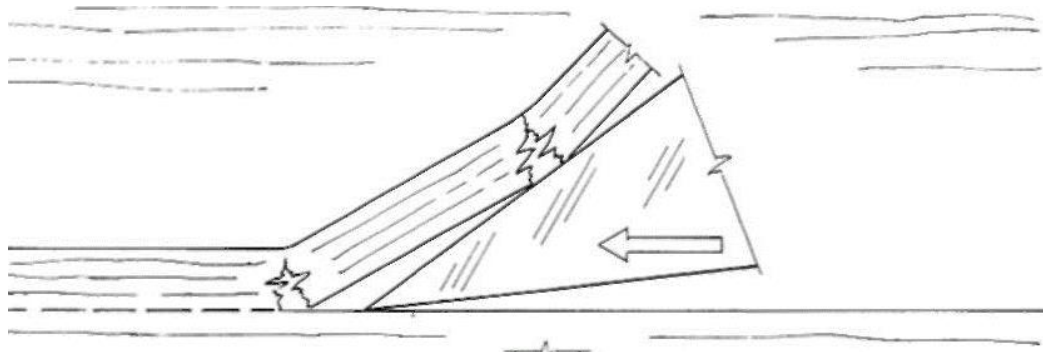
Fractures in chipped wood during hand planing without a cap iron. The chip bends as it slides up the cutting-iron and the wood fails ahead of the edge due to tension perpendicular to the grain. Finally, the chip breaks, whereupon the next segment of the cut starts. The fractures reflect onto the wood surface resulting in shadowy rippling (Hoadley 2000:162).
